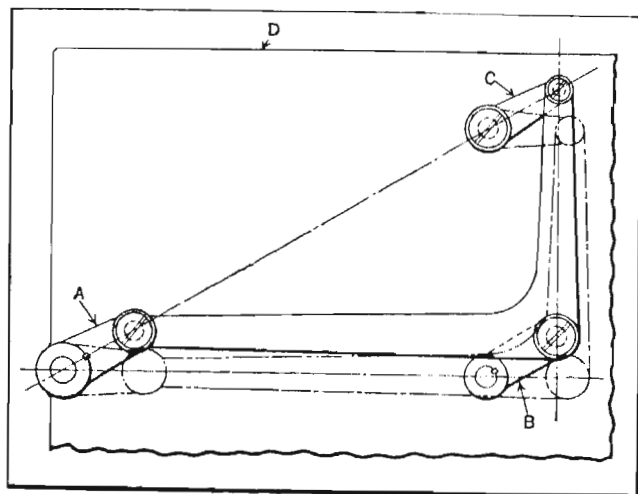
Arrangement for Preventing Crankpin from being Stopped on Dead Center
